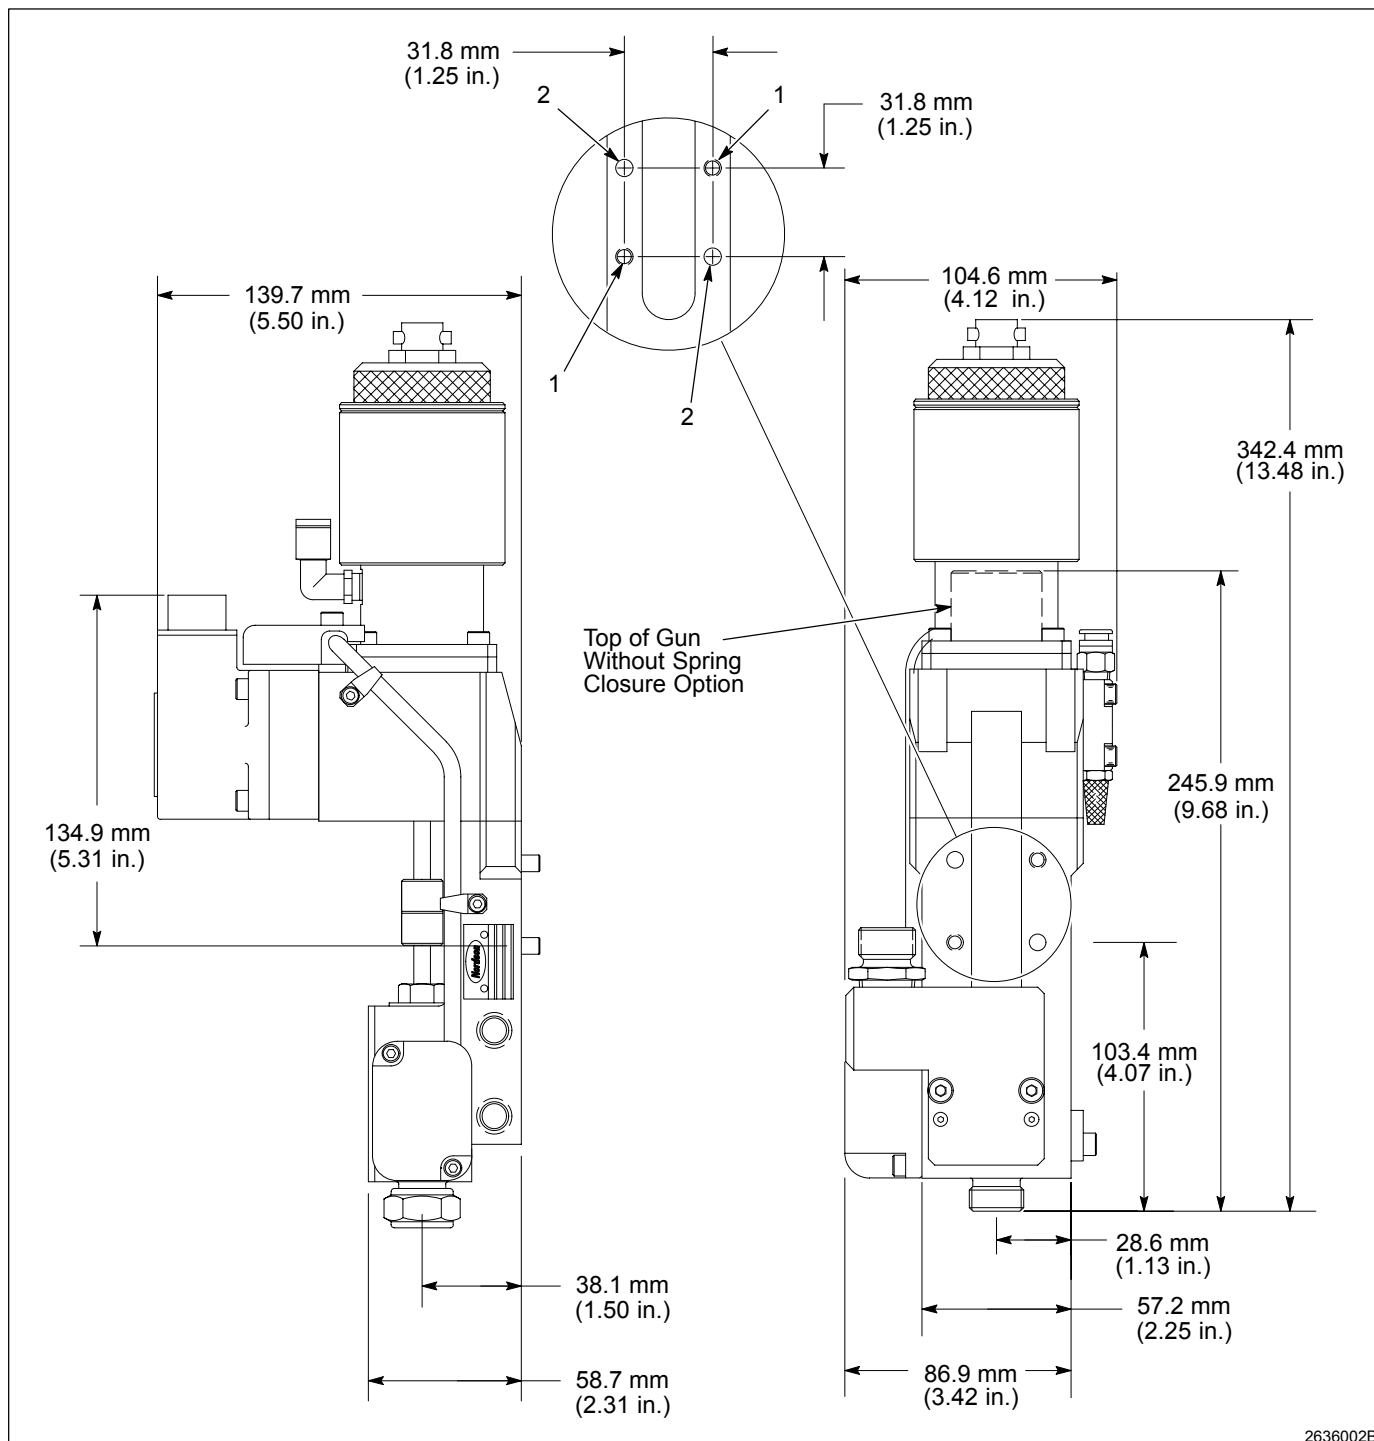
Pro-Flo III Hi-Flo Dispensing Gun Dimensions
